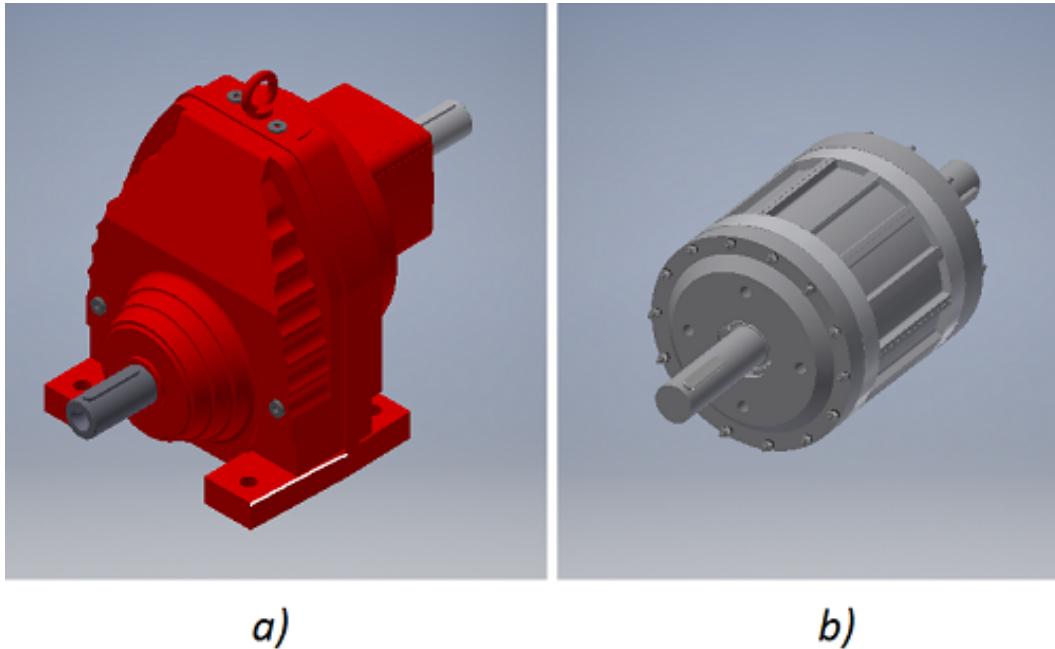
(a) SEW commercial mechanical gear (b) Designed magnetic gear
